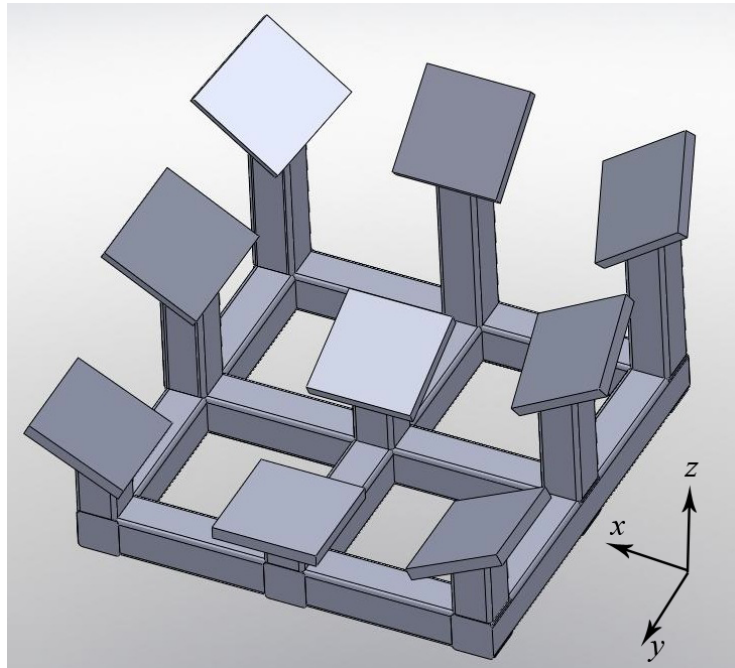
Welding fixture consisting of all x and y base metal orientations
